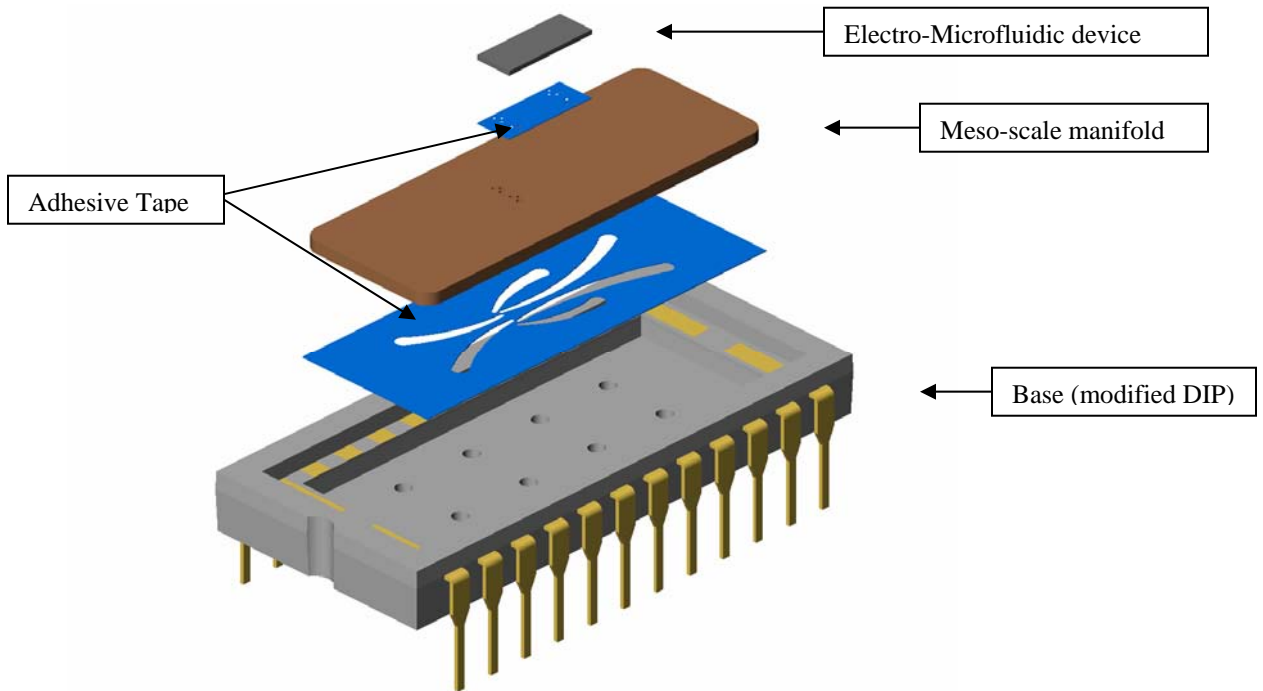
Exploded view of the 24-pin, 8-channel EMDIP™.
